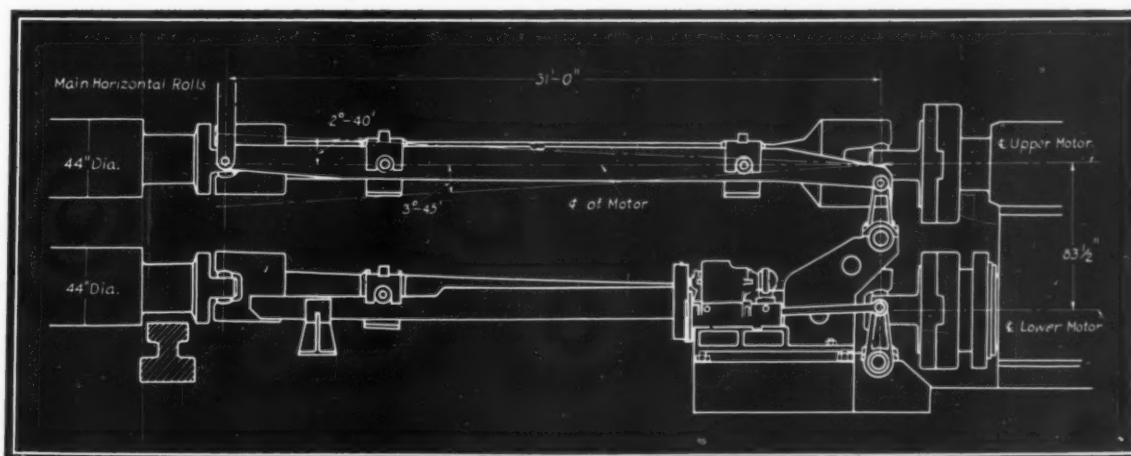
Arrangement of main spindles for 40-inch slabbing mill with twin-motor drive
